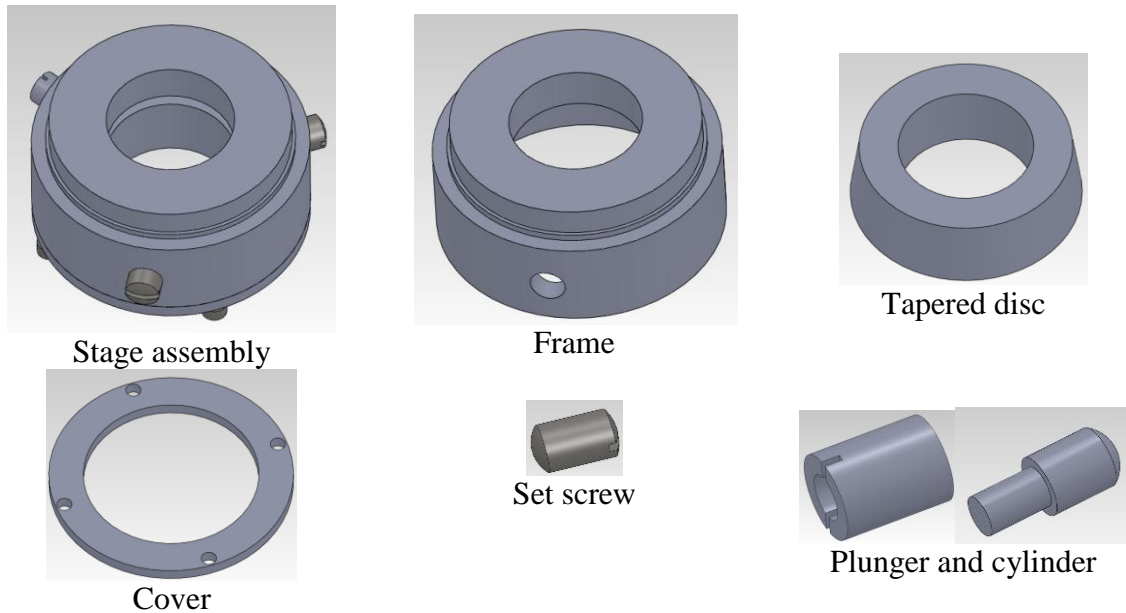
CAD models of the coarse adjustment prefocusing stage elements.
